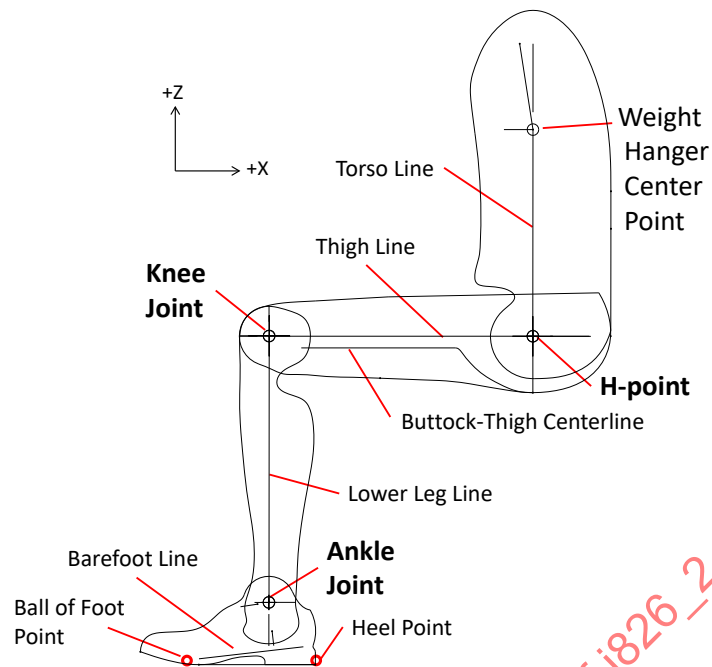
Side view of the assembled 95th 2-D HPD template reference posture
